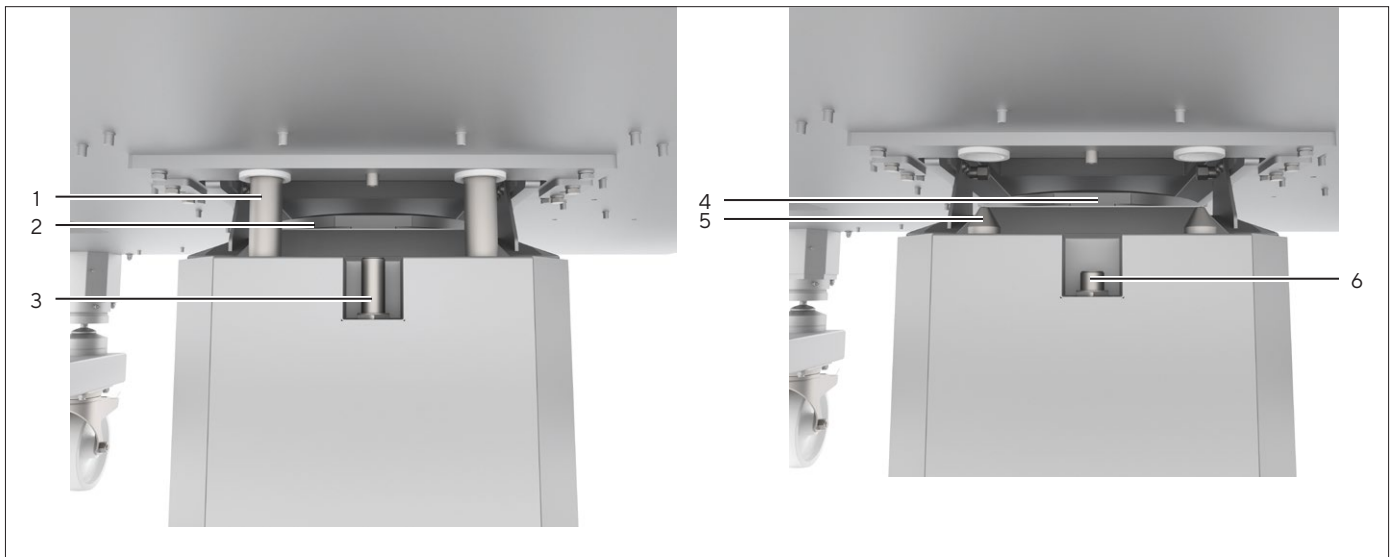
Device coupled with Palletank® for Mixing and decoupled from Palletank® for Mixing (example)
